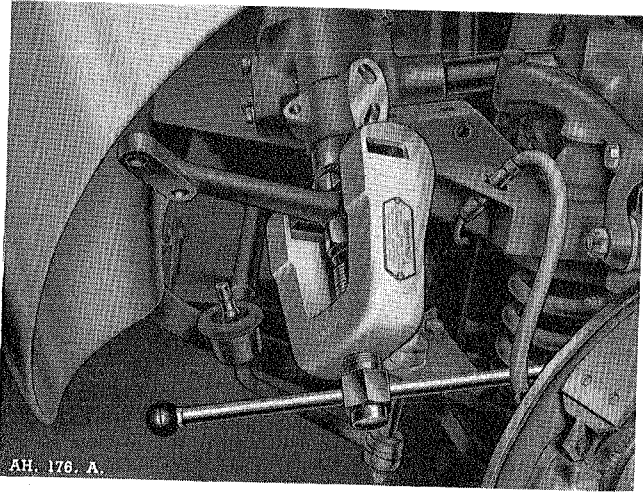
Using Service Tool GT.75 to remove steering lever.
